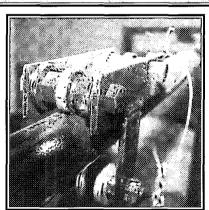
, top — Detail showing corner assembly of crane. Photo 9, center — Bottom of crane, showing casters. Photo 10, above — Detail of roller truck assembly mounted on crane.
